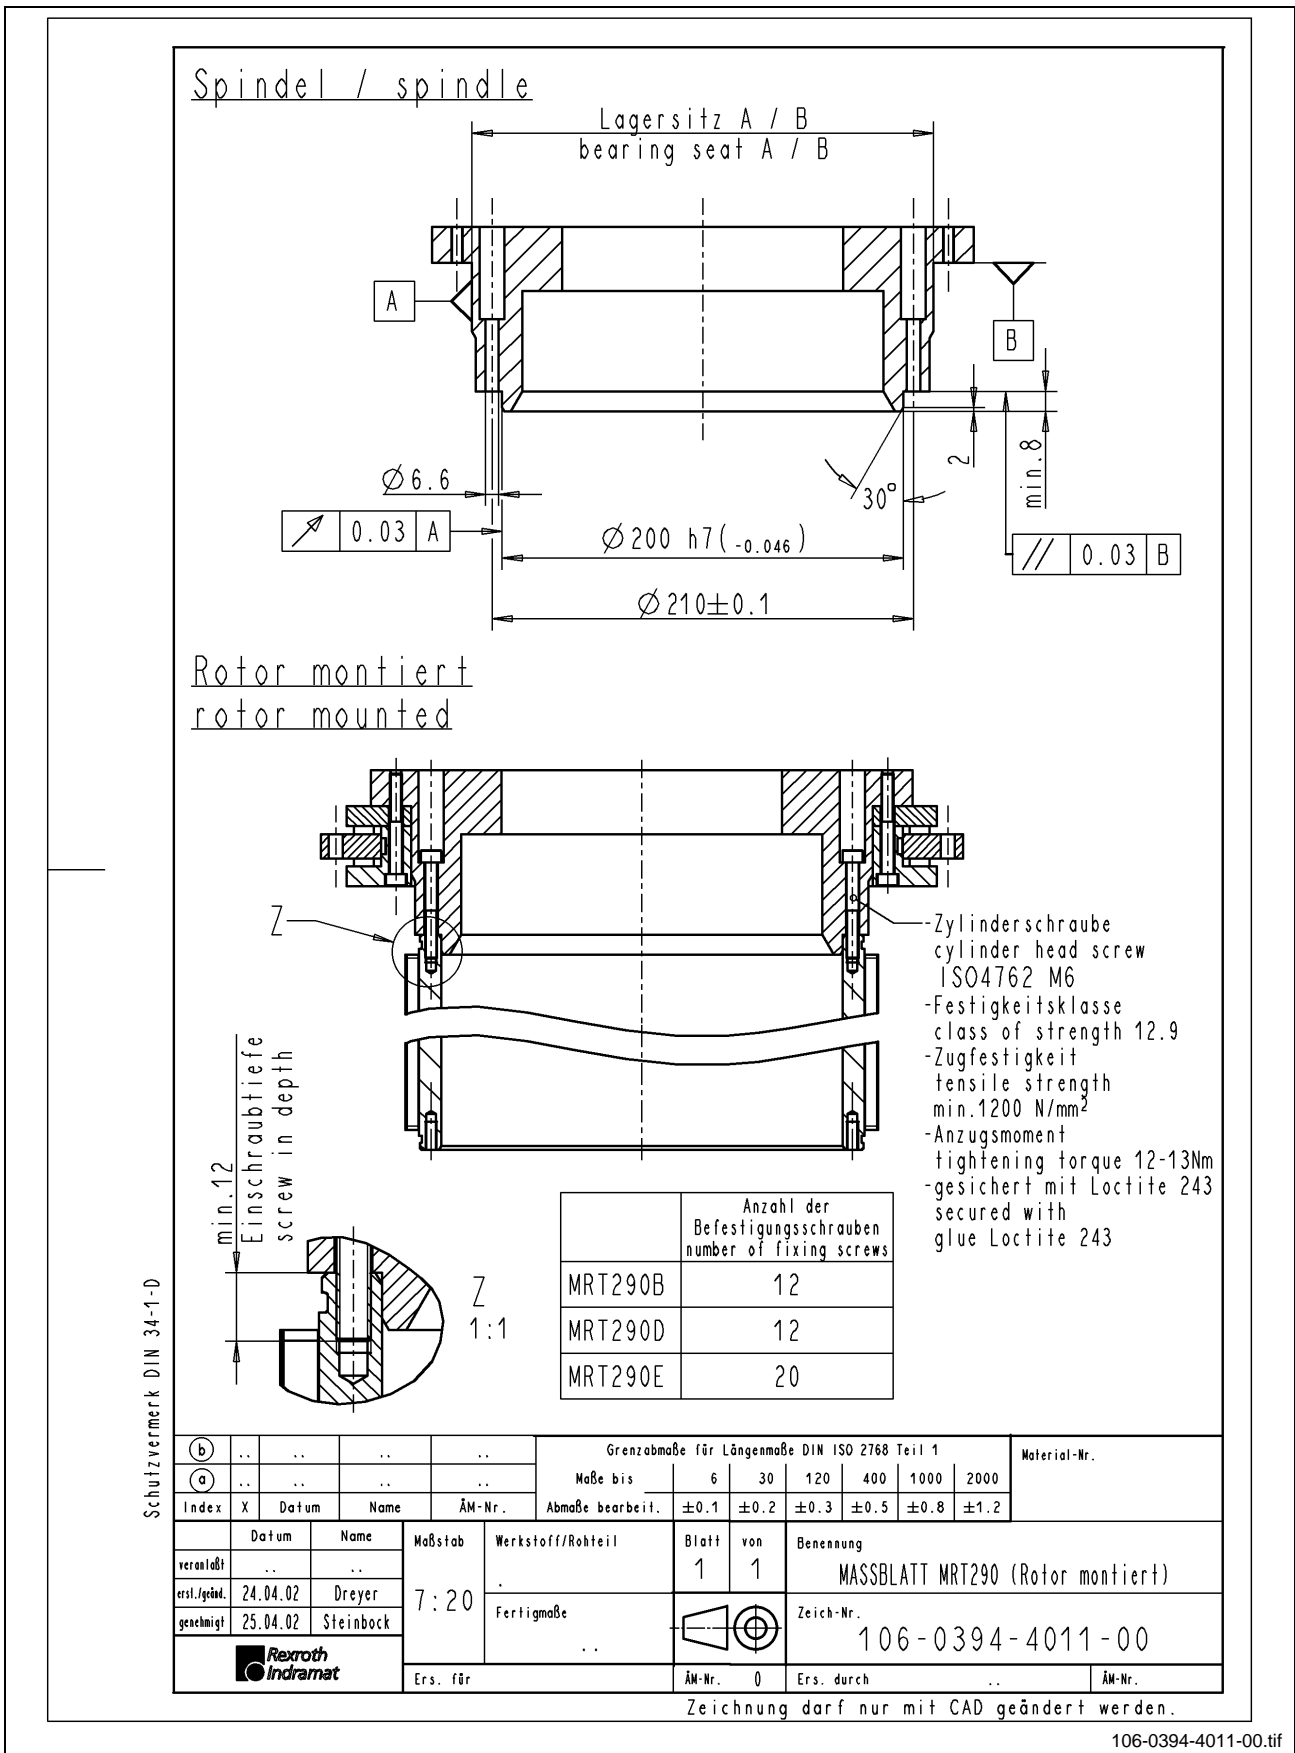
Dimension sheet Rotor MRT290, mounted
